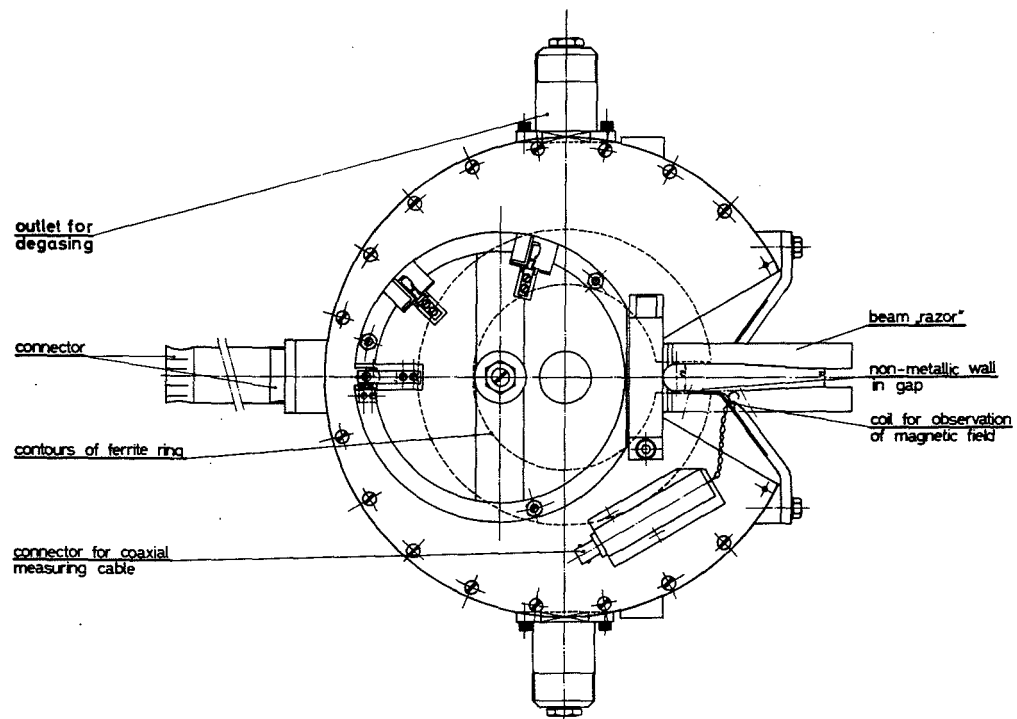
Sectional view of the kicker magnet in its vacuum tank.
